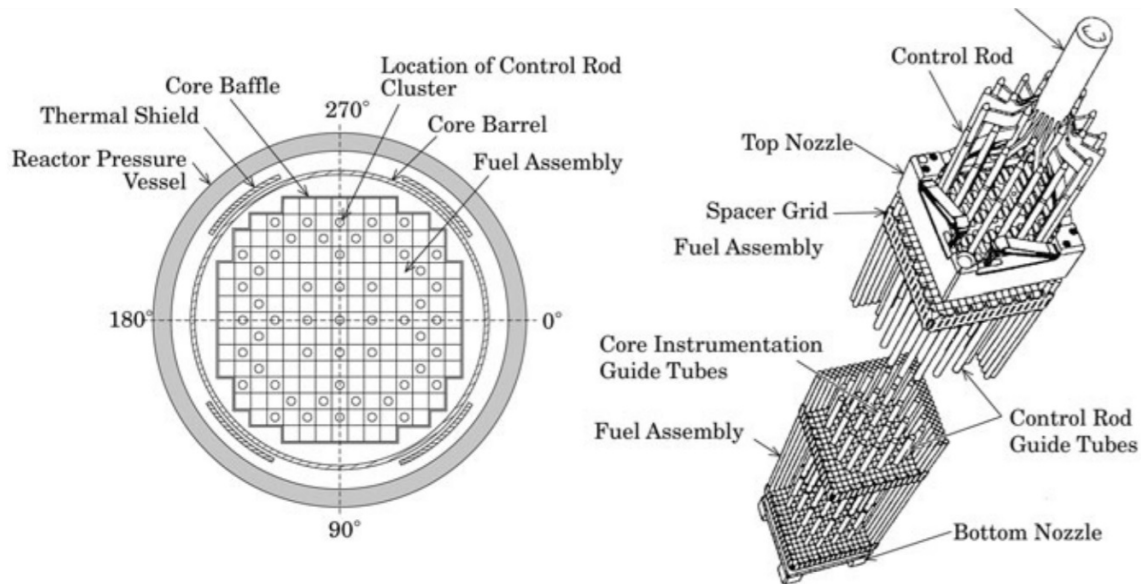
Cross-sectional view and fuel assembly of a PWR core [27] (Oka, 2014)
